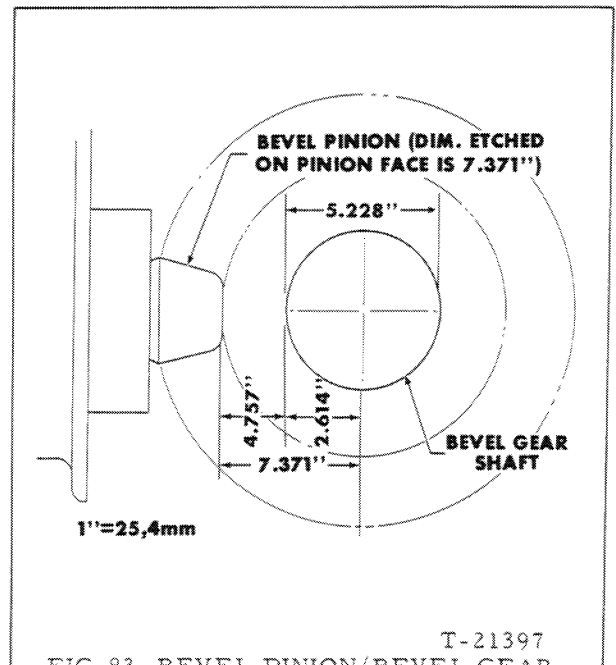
BEVEL PINION/BEVEL GEAR MOUNTING DIMENSIONS
